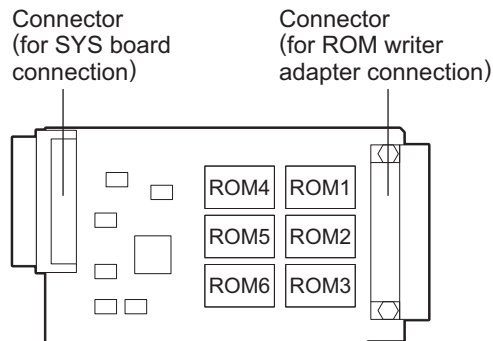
Jig board: PWA-DWNLD-350-JIG2 (48 MB)
